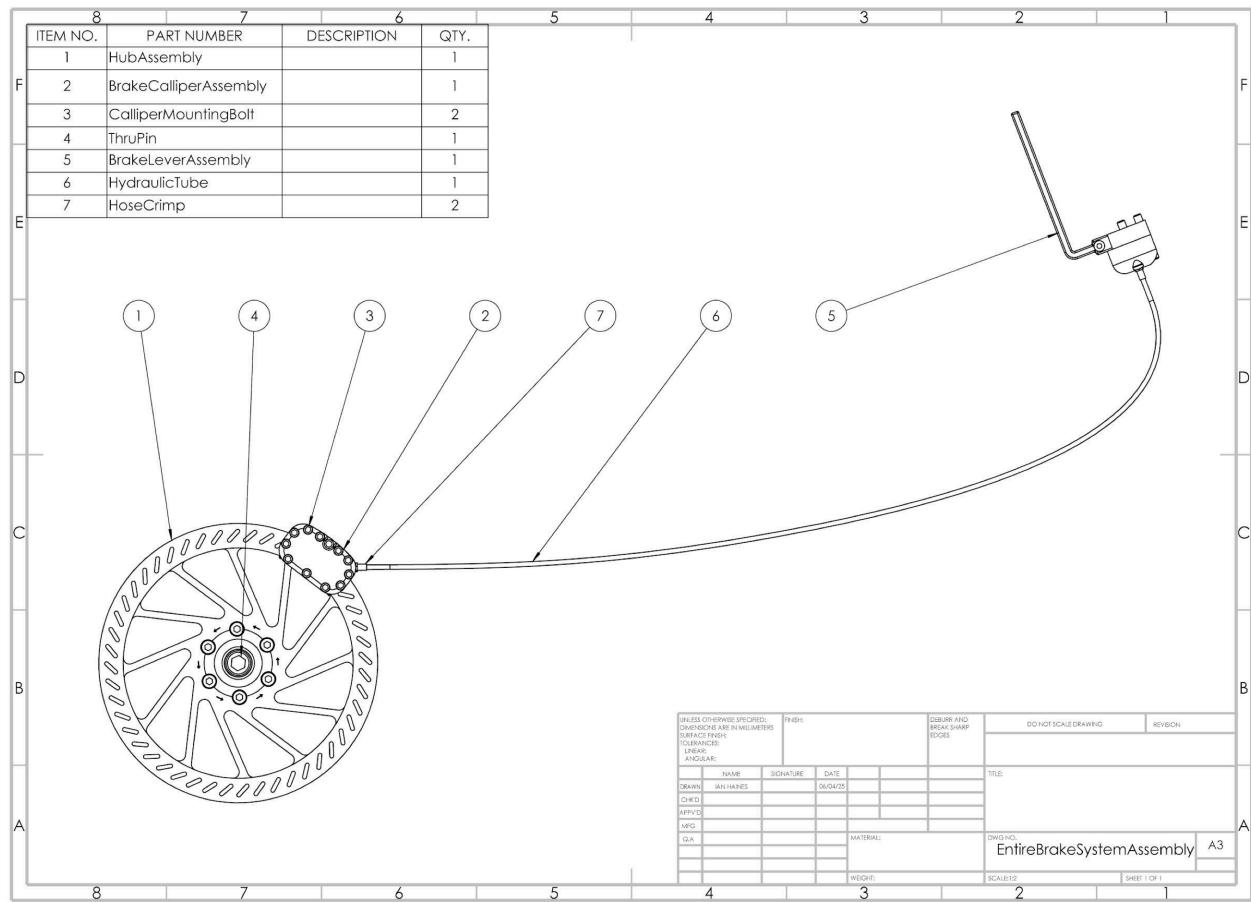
View of the entire braking system in its assembly positioning.
